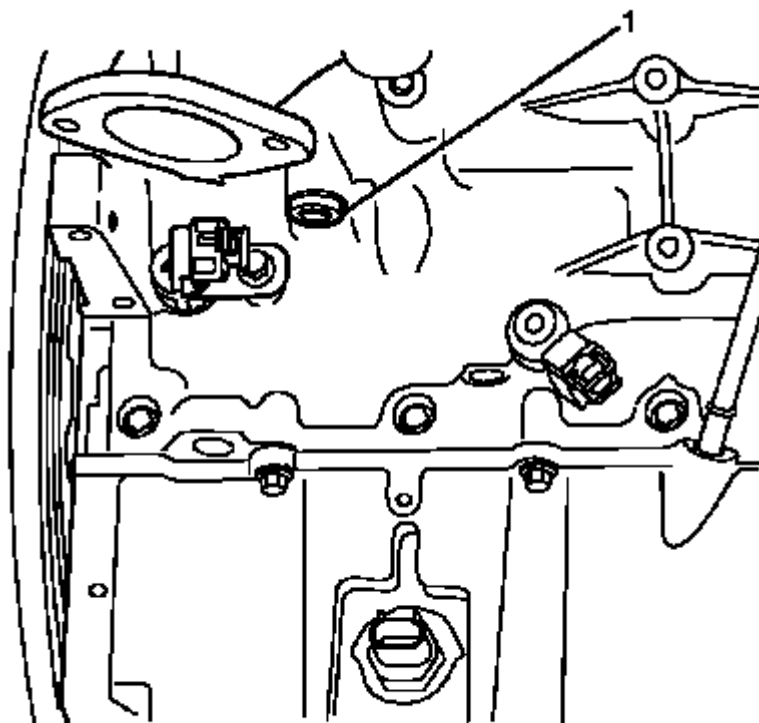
Identifying Right Side Rear Engine Block Coolant Drain Hole Plug & Washer
